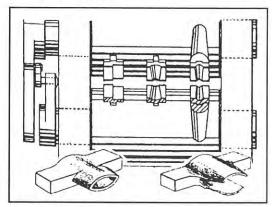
Patent illustrations of part of Bealor's pickhead machine and the stages that created the definitive handle flange. After the machine punched out the handle socket, the excess iron was drawn out in two halves, and the machine forge-welded them together. (Pat. 204,417)
